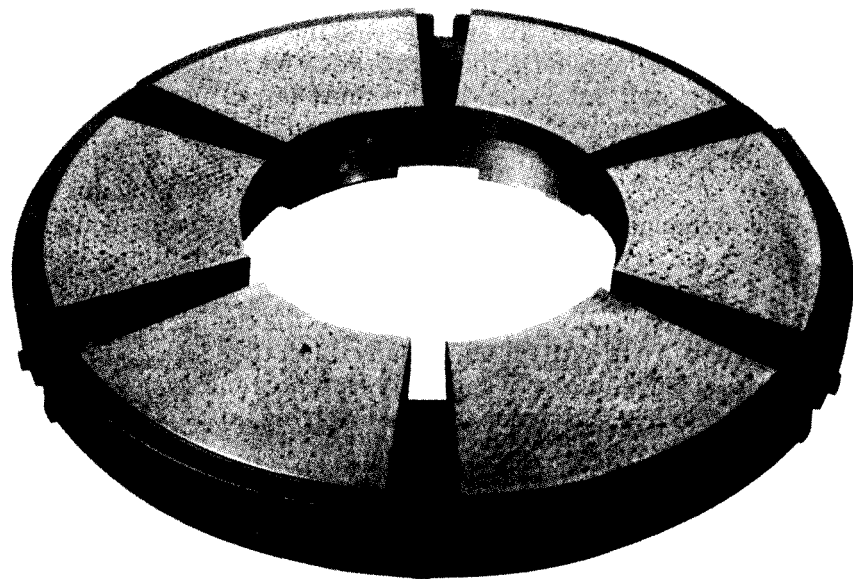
Thrust bearing showing results of hand scraping on the babbitt surface. Courtesy Kingsbury, Inc.
